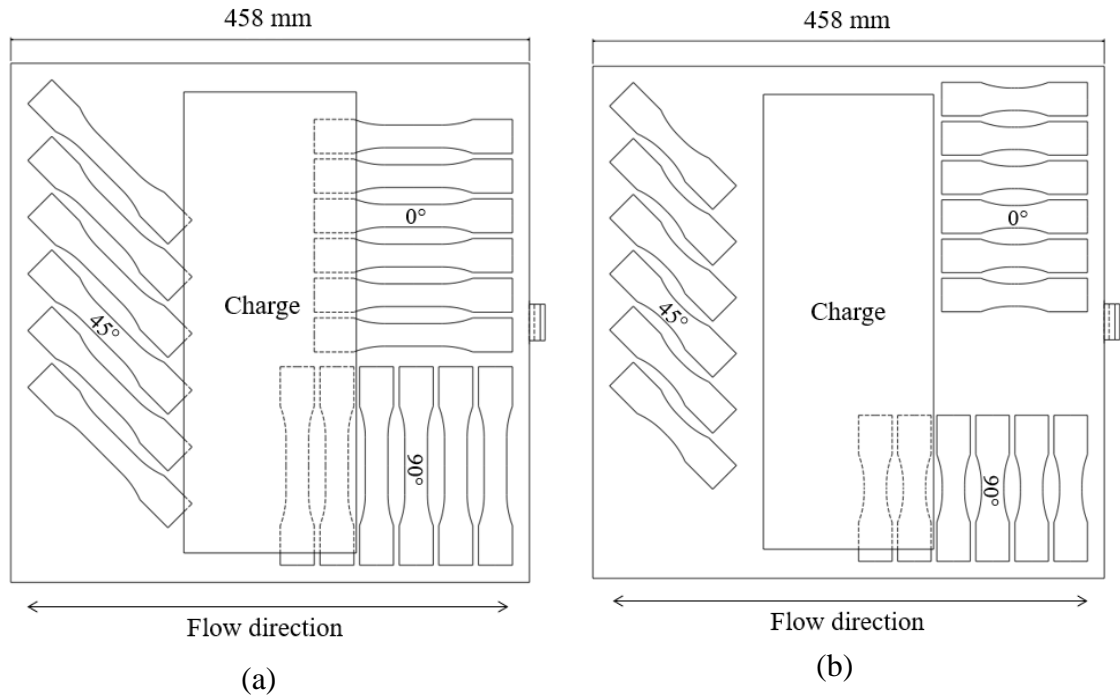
Uniaxial tension size effect specimen layout: (a) ASTM D638 Type III, (b) ASTM D638 Type III with reduced gauge length (6.25 mm shown)
